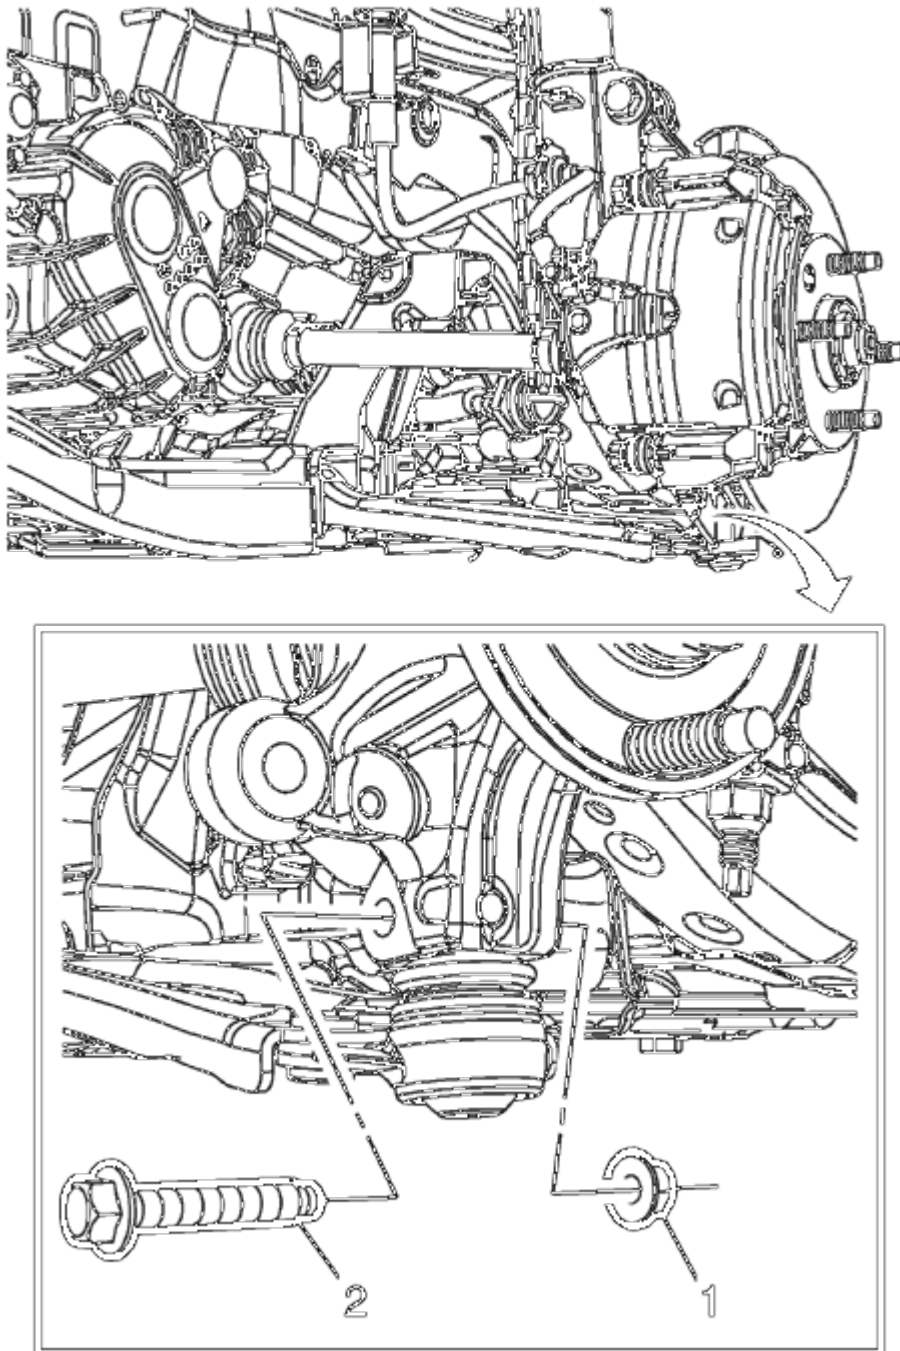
Control Arm Ball Joint To Steering Knuckle Bolt
